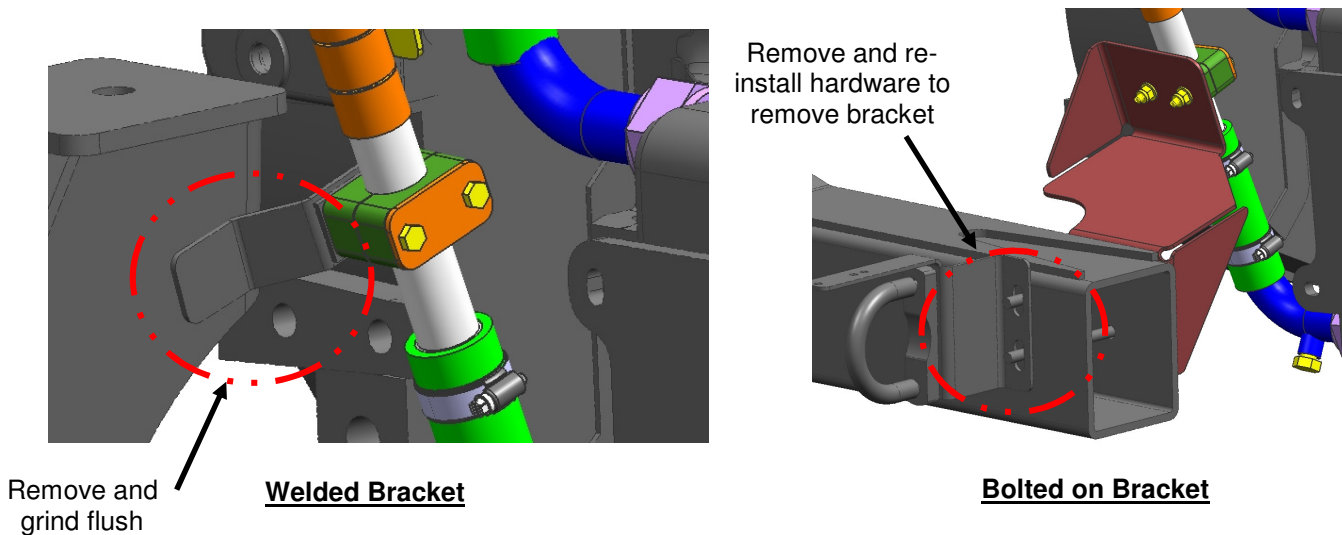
Booster Pump Supply Line Clamp Support Bracket Removal
